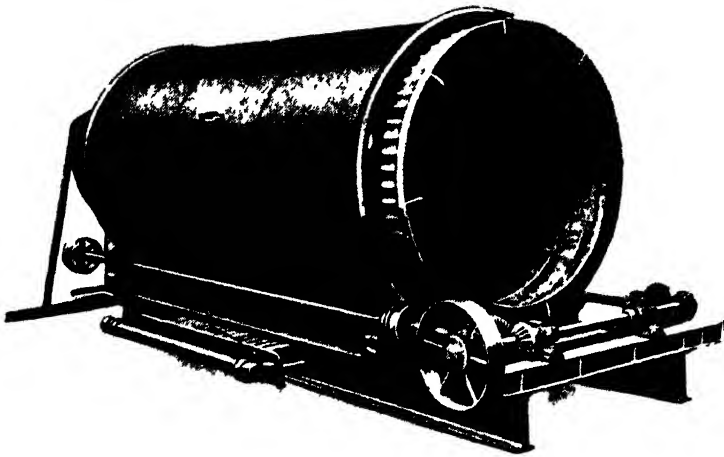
A SAND DRYER (VIEW FROM CHARGING END).
